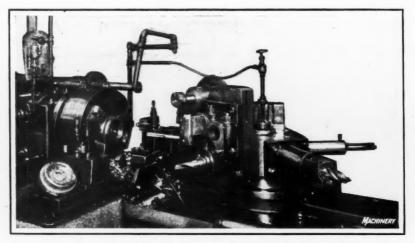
Equipment provided on an Automatic for finishing Gear Blanks preparatory to cutting the Teeth
